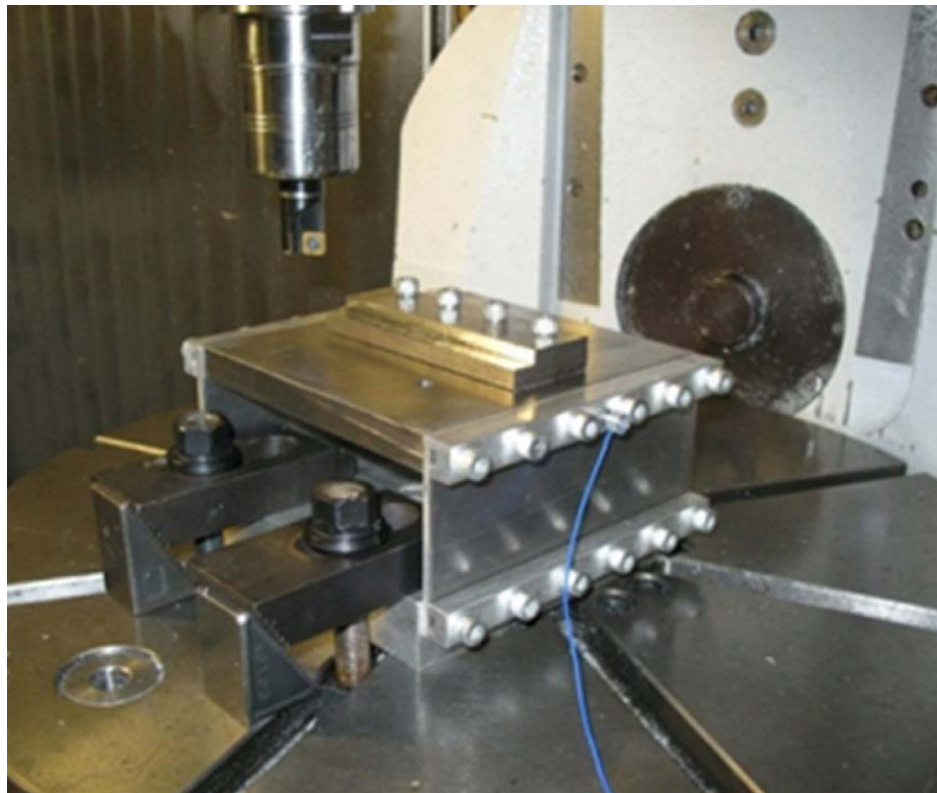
Example parallelogram, leaf-type flexure used for milling experiments. A workpiece is mounted to the top of the flexure, an accelerometer is used to measure the vibration during cutting, and an inserted cutting tool is pictured.
